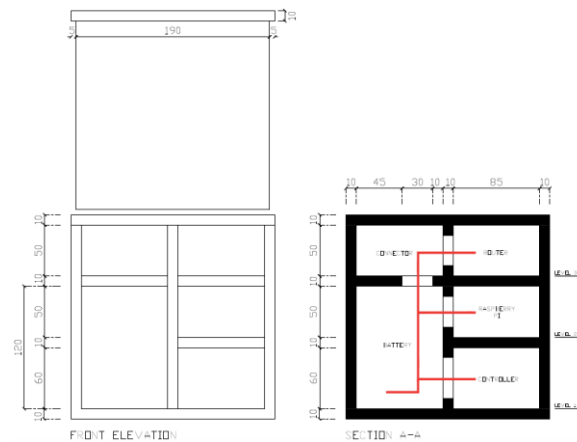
Front Elevation and Section A-A view of ID-QUBE
